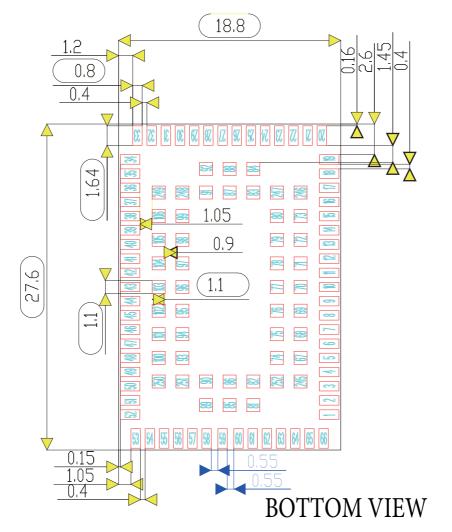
Dimensions of ELS31-VA/ELS51-VA (all dimensions in mm) - bottom view
